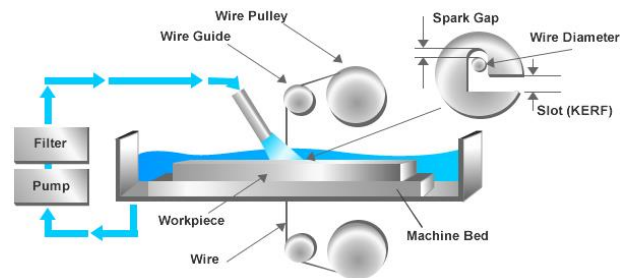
Schematic view of wire electrical discharge machining Process [American Wire EDM 2015]
